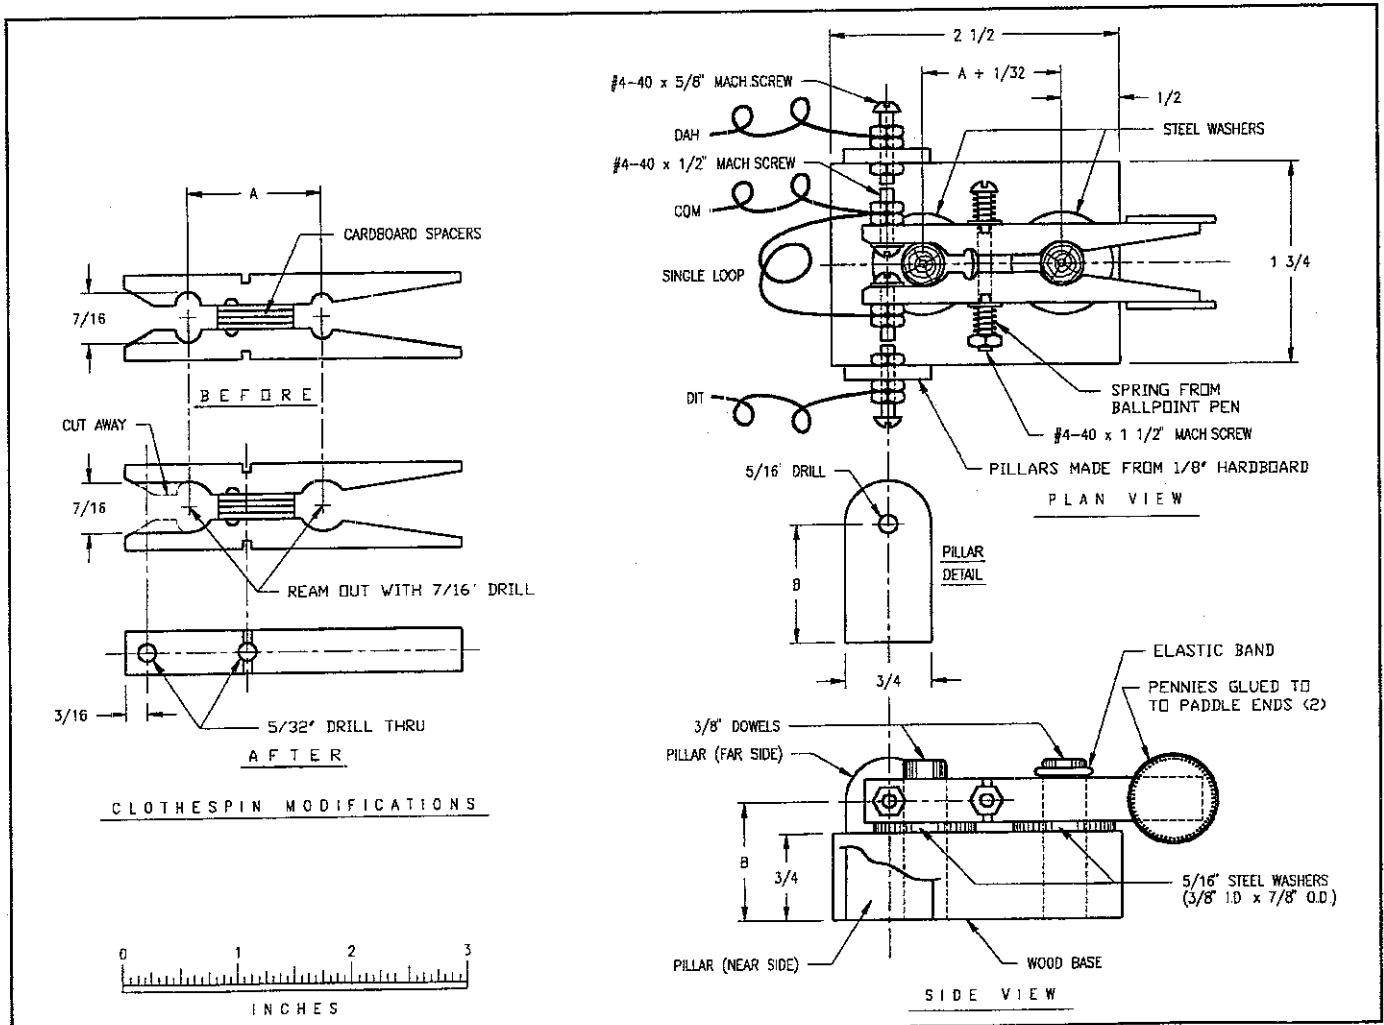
Mechanical diagram for the Tuppenny Paddle. (All dimensions shown are in inches)
